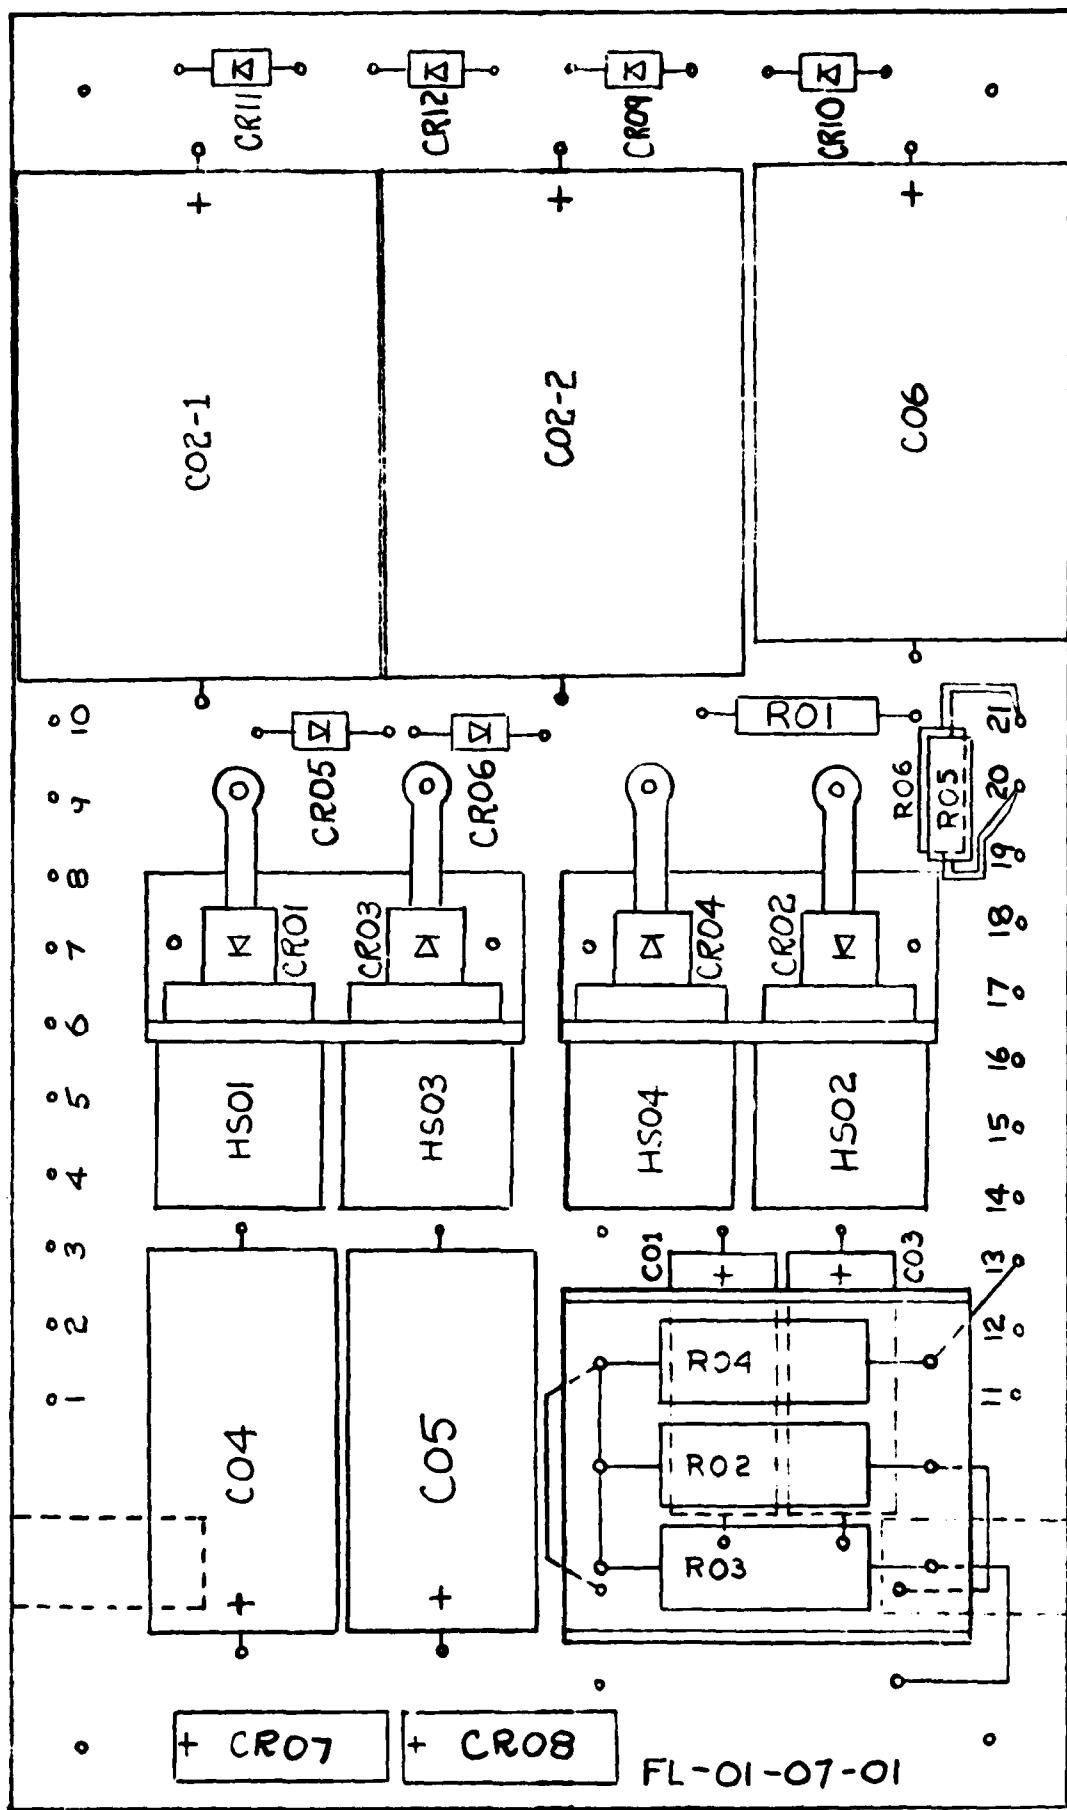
COMPONENT LAYOUT FOR PRINTED CIRCUIT BOARD USED IN THE AC TO DC CONVERTER
